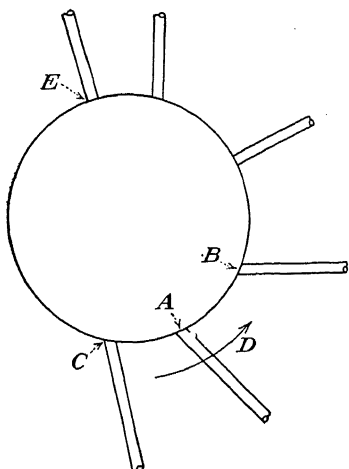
Overhead pipe weld showing position of electrode as weld progresses. A to B. Most difficult welding area on pipe weld. C. Starting point of weld. D. Direction of weld. E. End of first half weld.
